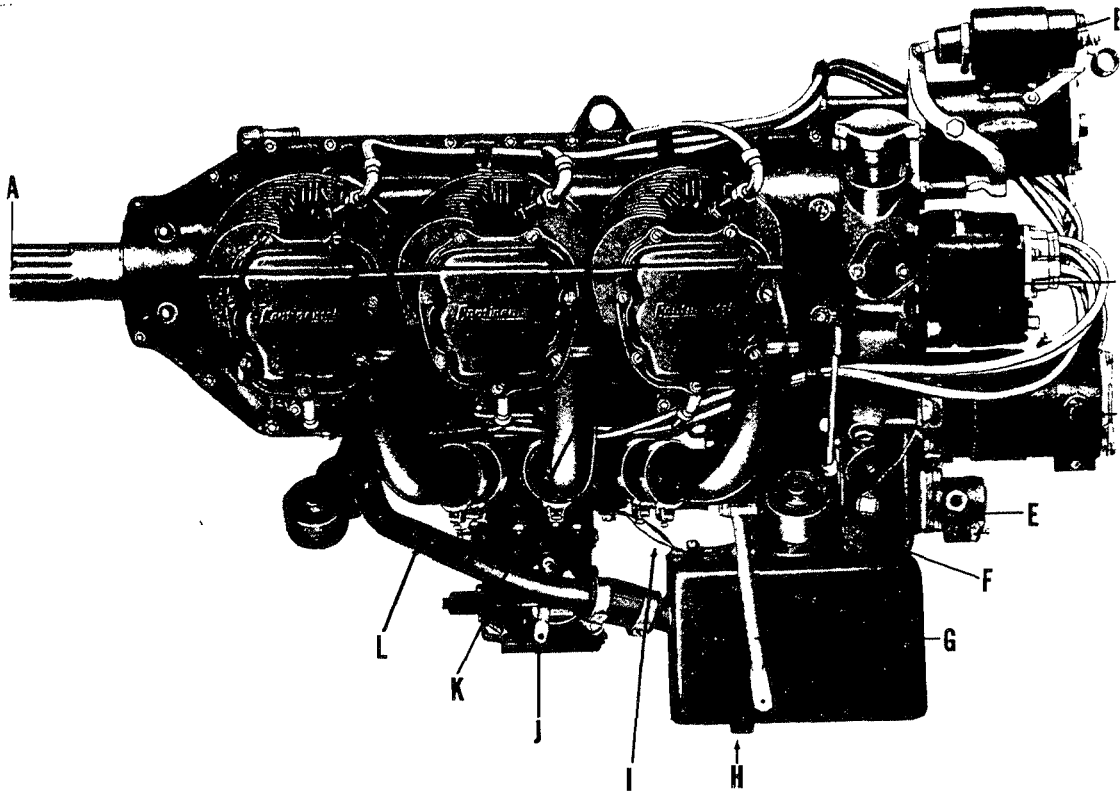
RIGHT SIDE VIEW OF WET SUMP ENGINE (E185-3).
